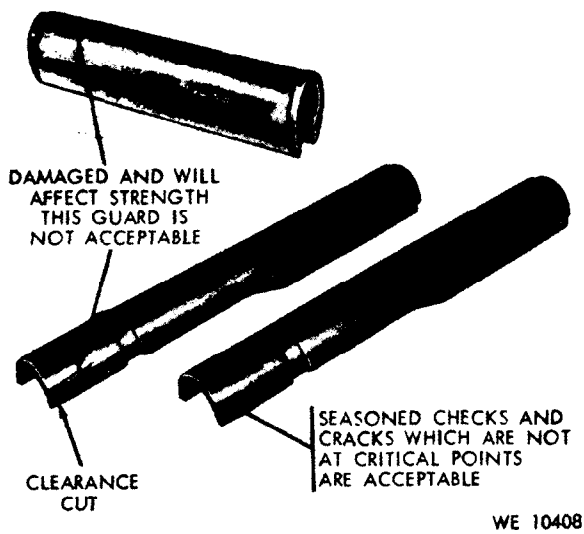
Gun hand guard defects and clearance cut for rifles.
